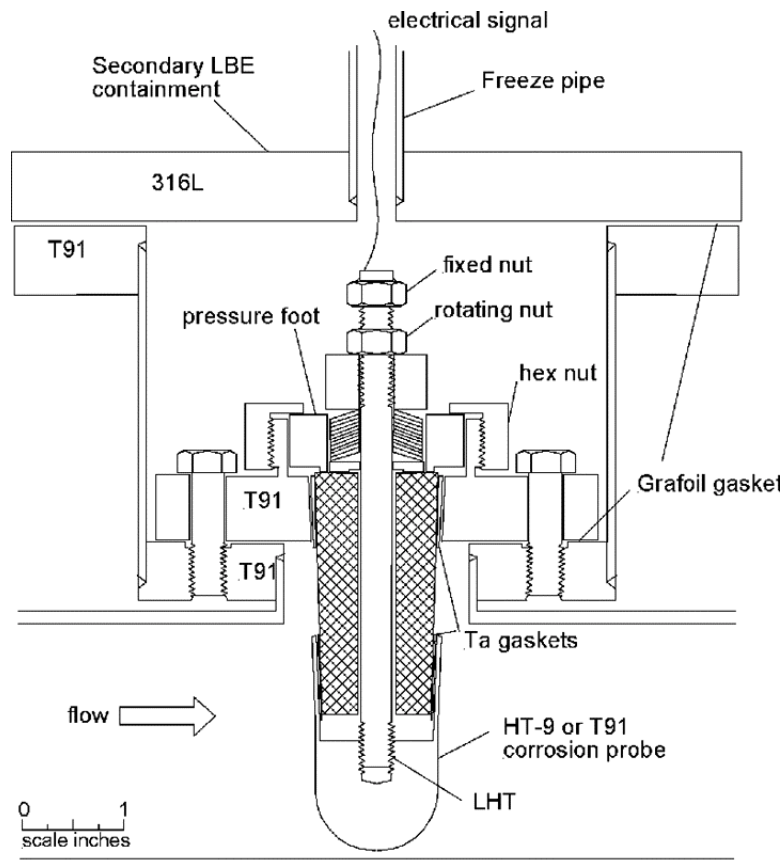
Cross section through a Ta-sealed press-fit assembly. Uses 3° taper for upper and lower joints.
